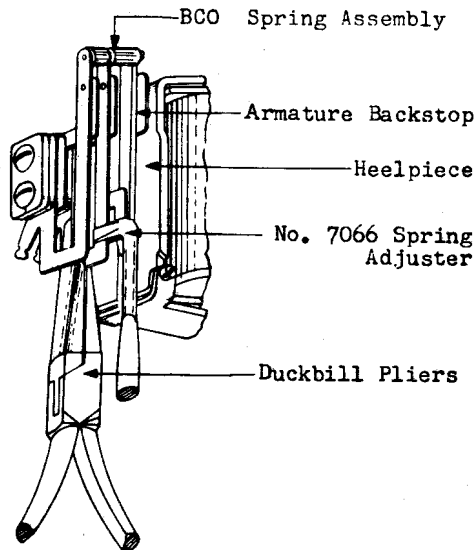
B Relay of Primary Line Switch - Method of adjusting BCC Springs for Spring Gauging
